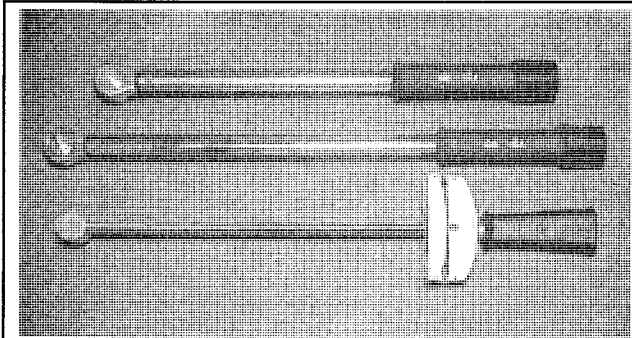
Three types of torque wrenches. Top to bottom: a 3/8 in. drive beam type that reads in inch lbs., a 1/2 in. drive clicker type and a 1/2 in. drive beam type
